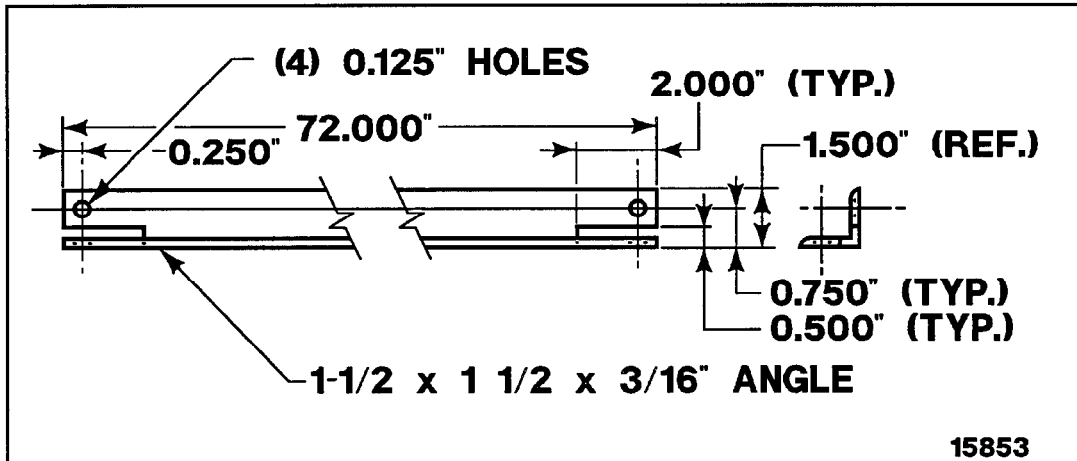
MANUFACTURING DETAILS FOR SPREADER BAR
